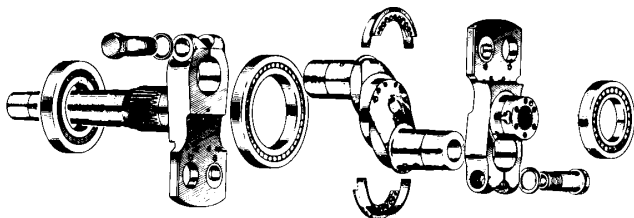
Clamp-type Crankshaft Representative of Those Tested By Pratt & Whitney (Navy)
